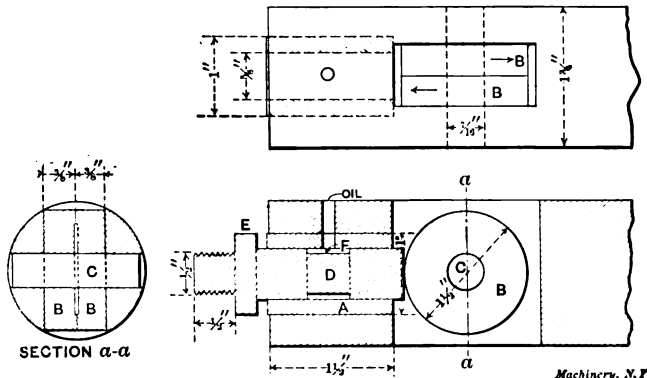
Sectional View showing the Back-center and its Double Roller Bearing
